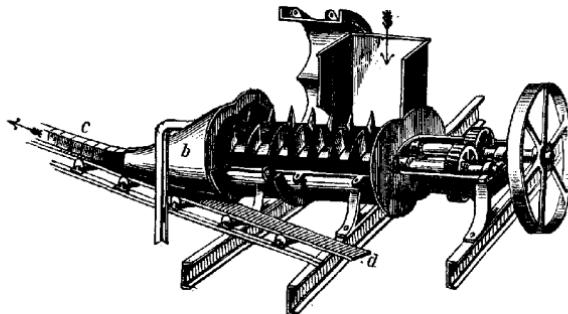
Cutting cylinder of Grotjahn's machine.
